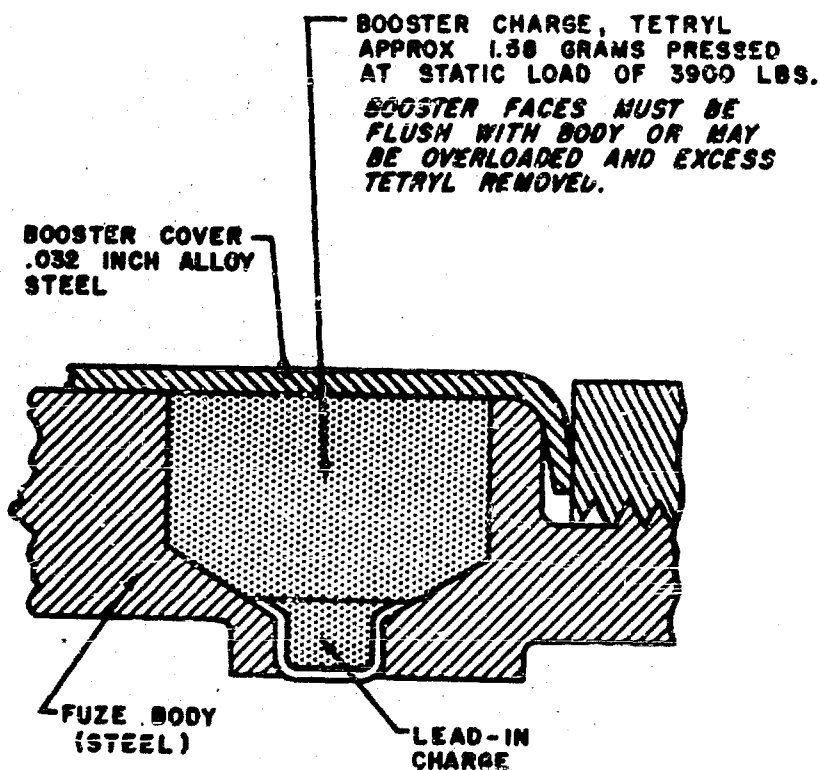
Booster Assembly for Base Detonating Fuze Mk 21 Type.
